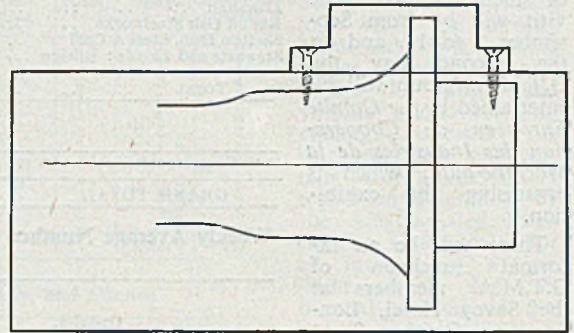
Second example of a "Set-out," showing an Extension Piece to accommodate a Larger Pattern.
